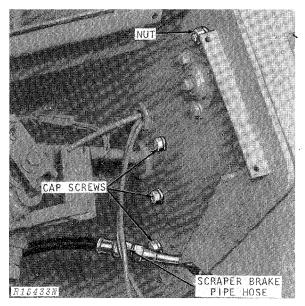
Scraper Brake Hose, Cap Screws, and Nut (Instrument Panel Removed for Illustration Purposes)
